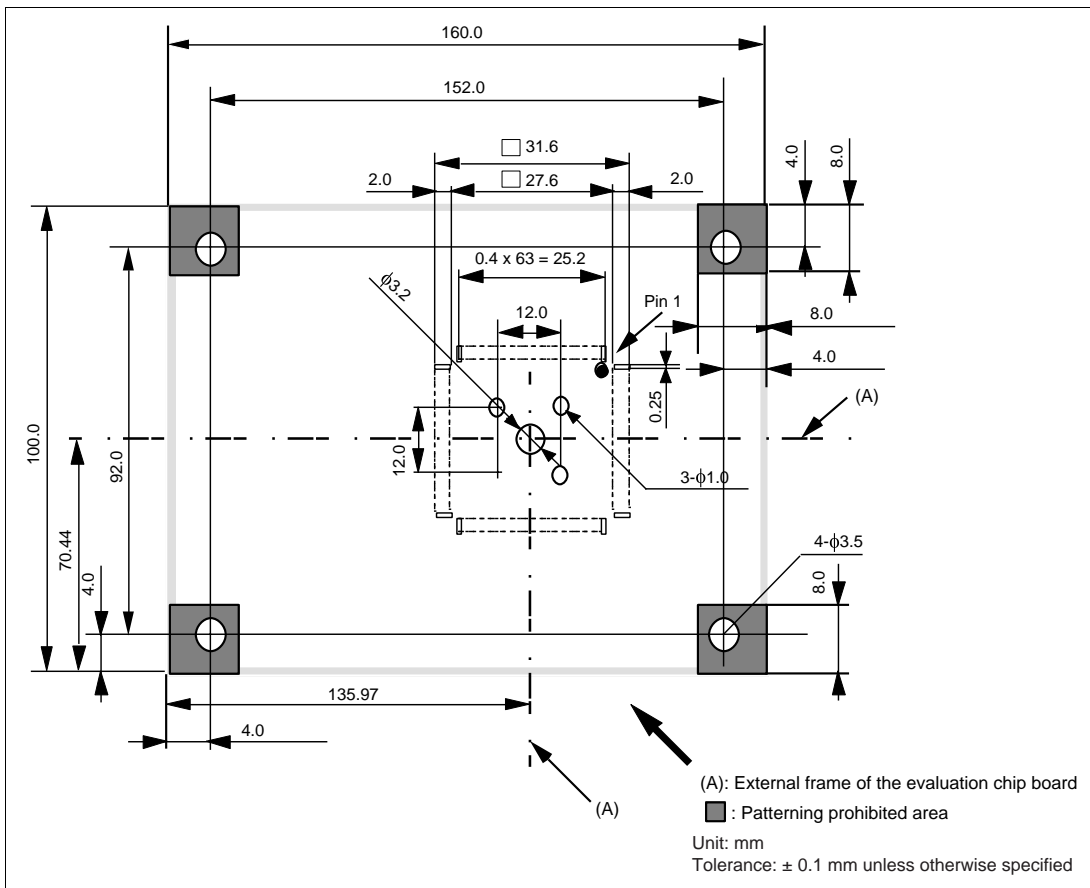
Recommended Dimensions for Mount Pad (Top View)
